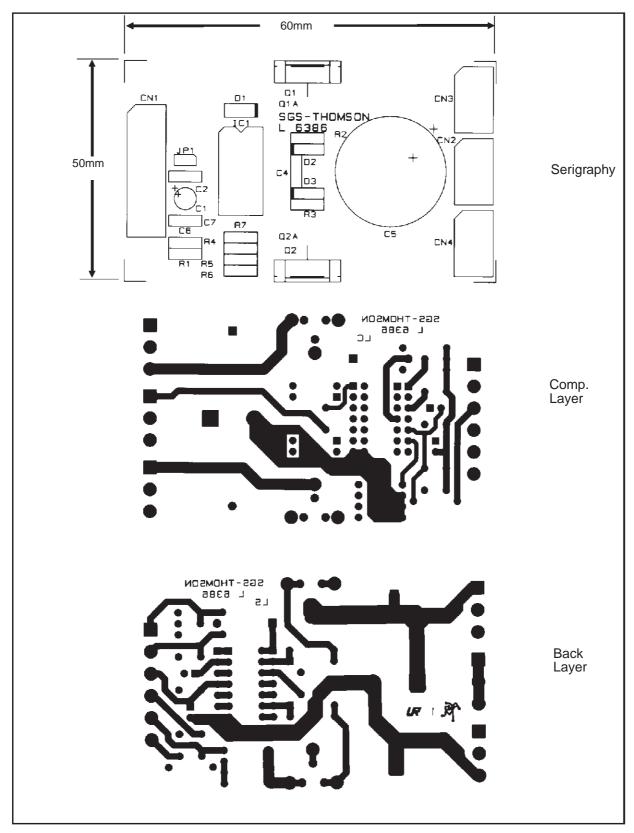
L6384 - PCB and component layout of the fig. 5.
